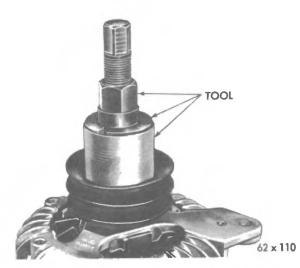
Removing pulley (Tool CA-3615) Adaptors CA-3615/1.
